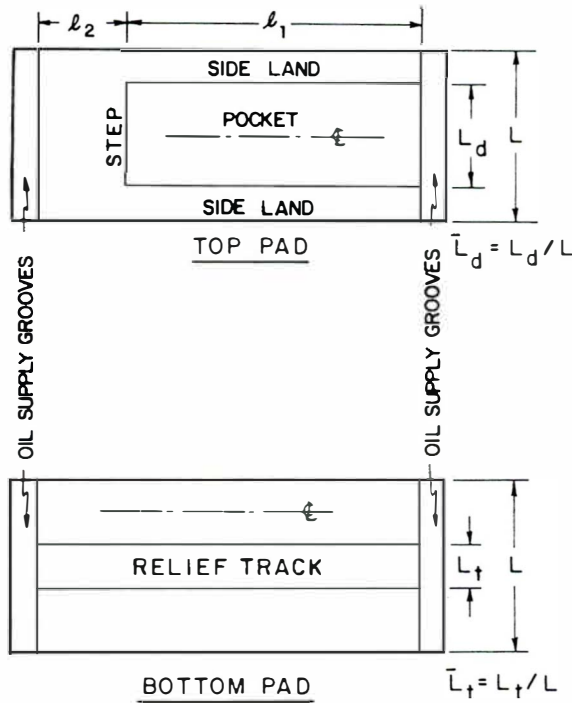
Pressure dam or step journal bearing schematic, top and bottom pads.
